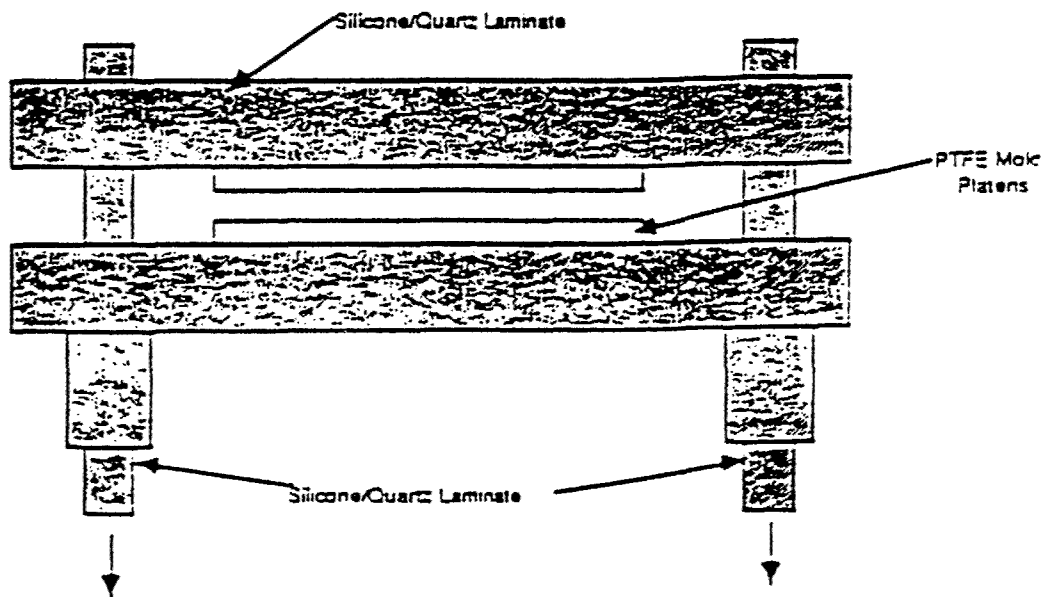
Platen Press Mold Tool Design for Use in a 7-in. Diam Resonant Microwave Cavity
